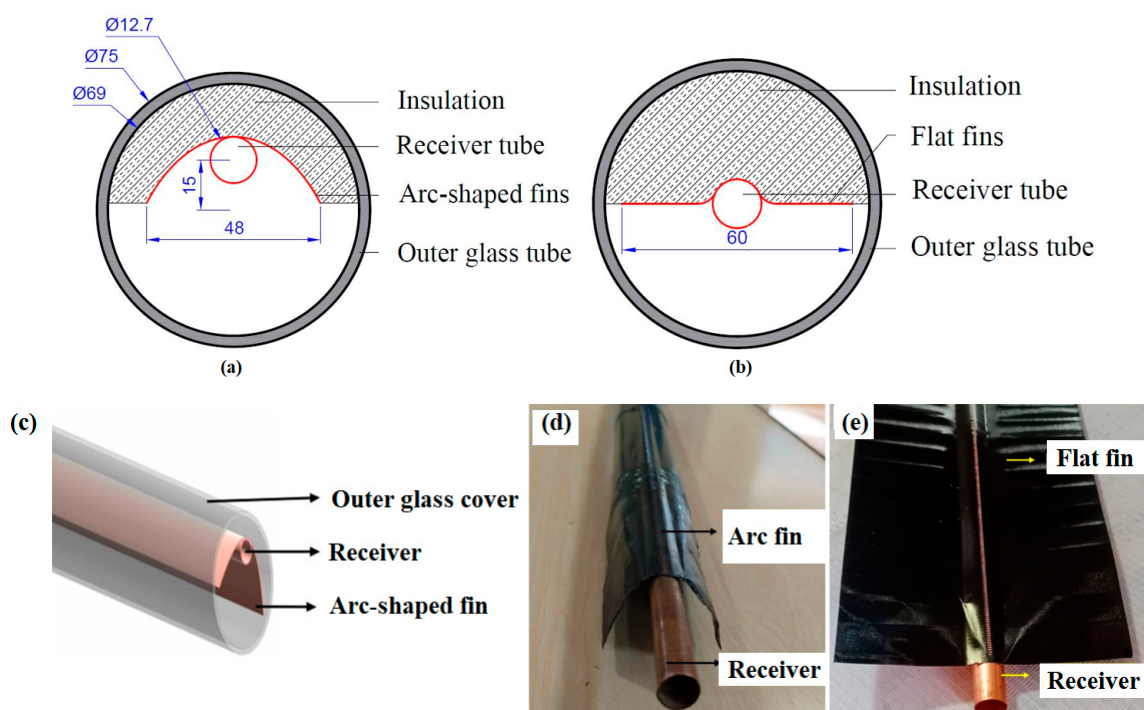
A two-dimensional schematic view of the receiver's cross-section: (a) Arc-shaped fins; (b) Flat fins. Three-dimensional and actual views of receiver tubes: (c) Three-dimensional view of arc-shaped fins; (d) Arc-shaped fins; (e) Flat fins.
